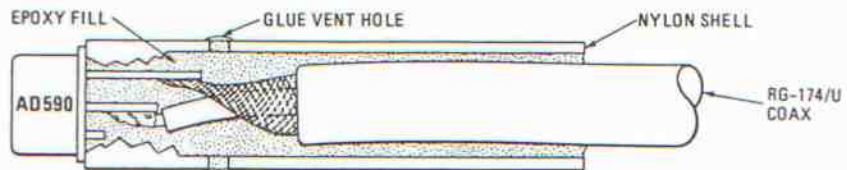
DETAILS OF THE PROBE ASSEMBLY. The potting compound seals the probe against moisture and other contaminants.
